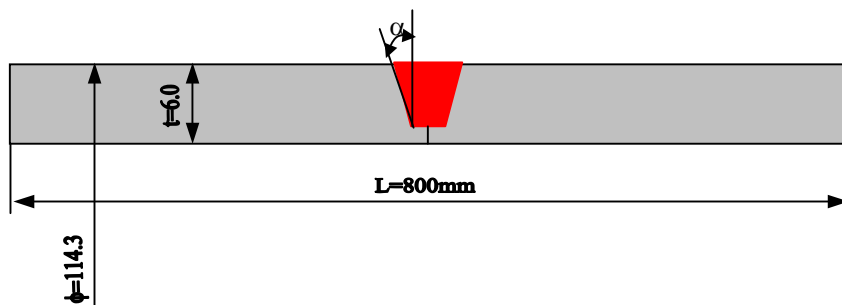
Dimensions of welded pipe and shape of groove.
